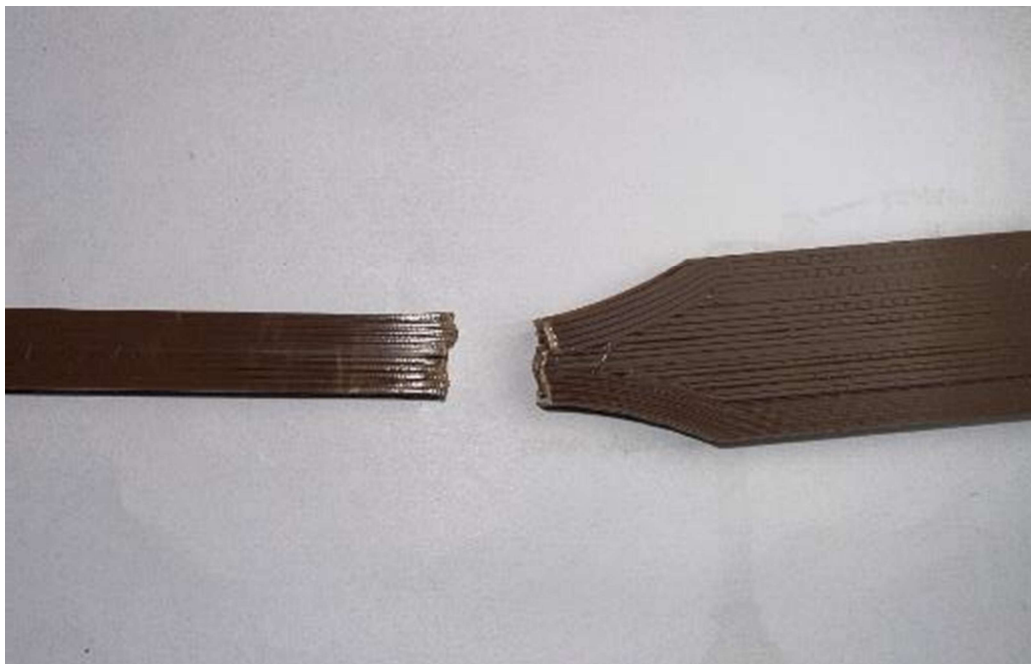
Failure mechanic of eSun PLA+ tensile specimen.
